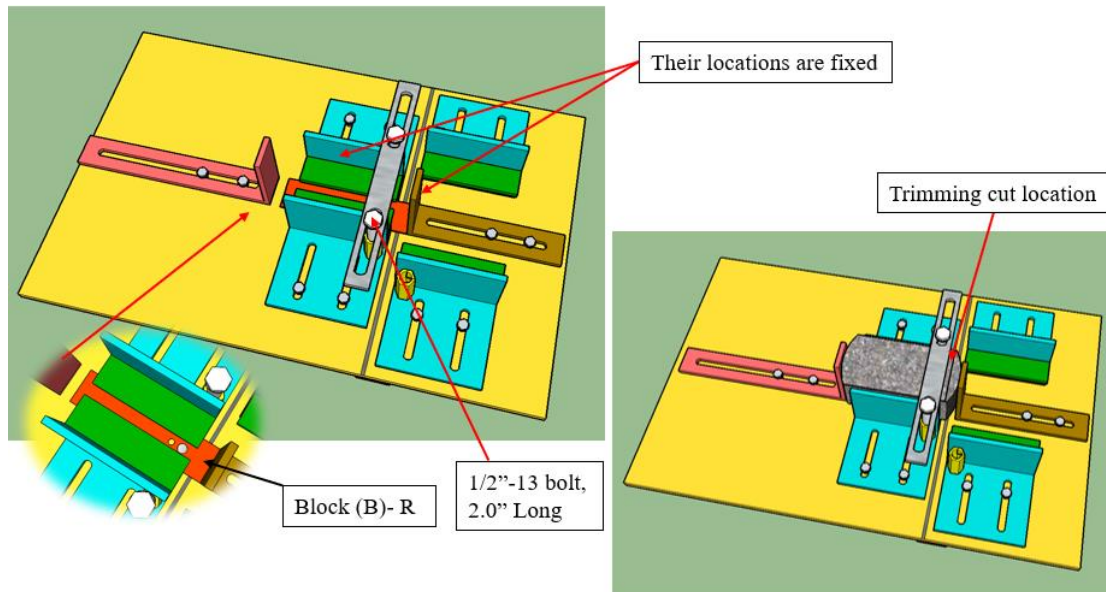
Illustration drawings to the third trimming of RH specimens.
